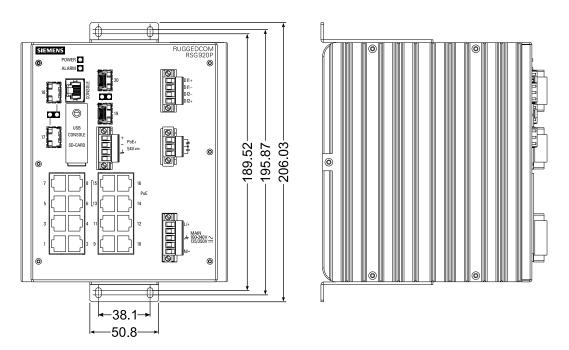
Panel Mount Dimensions (Rear Mount Shown)
